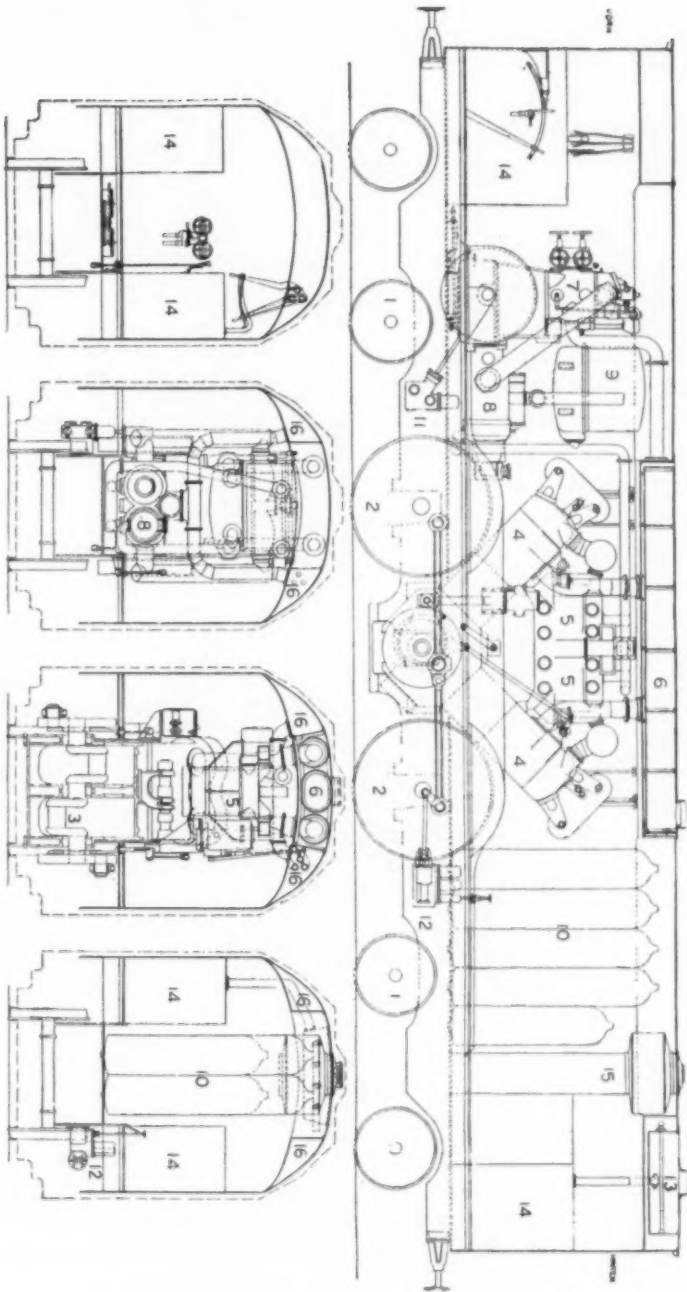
SECTIONAL VIEW OF DIESEL LOCOMOTIVE SHOWING CAR CONSTRUCTION
